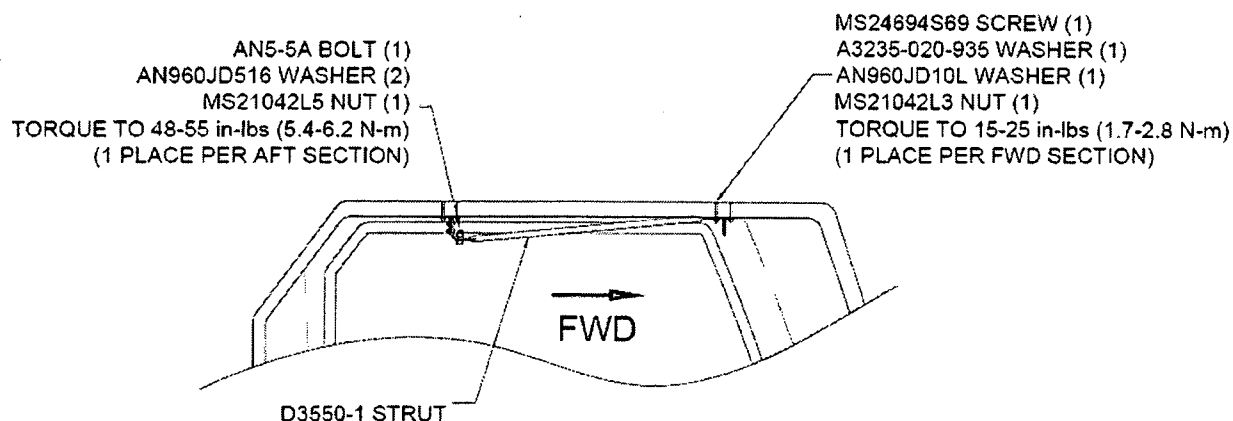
BRACKET AND BALL STUD INSTALLATION
